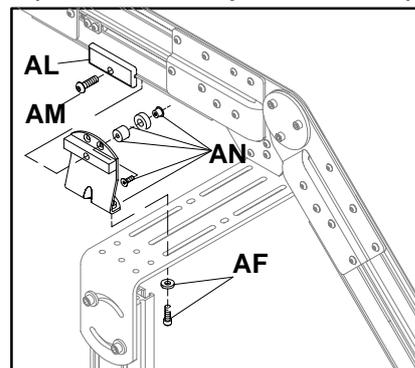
LPZ Series Cleated-Belt Conveyor Mounting Bracket with Return Belt Roller Assembly
